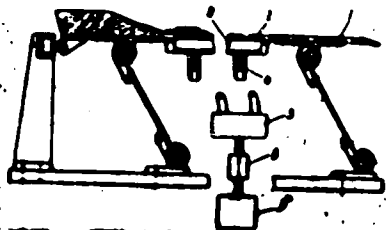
Vibratory vacuum conveyor for flat air-tight parts
